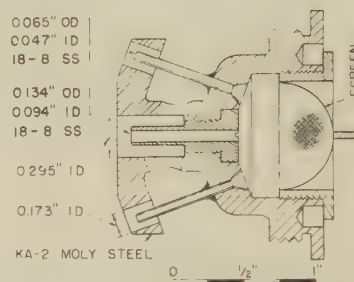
SCALE DRAWING OF FUEL ATOMIZER
